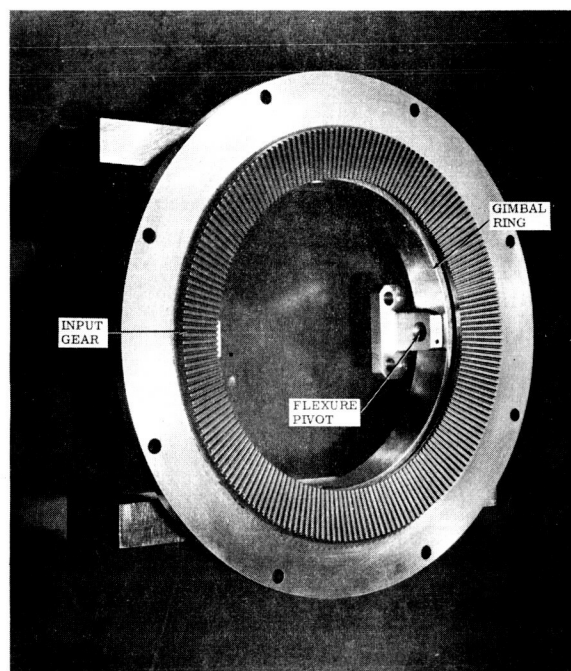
INPUT GEAR AND GIMBAL RING - FRONT VIEW
